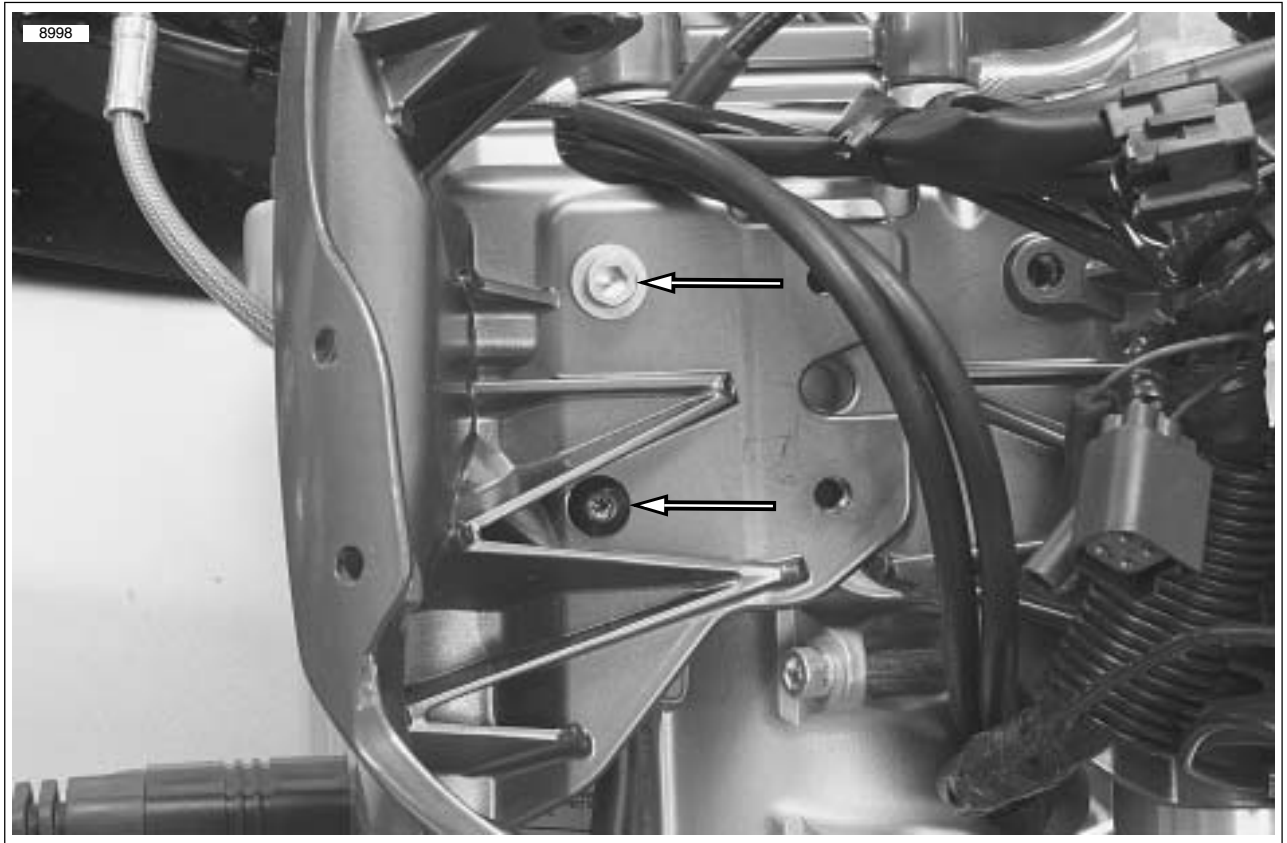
Right Front Module Fastener and Brake Line P-Clamp Fastener
